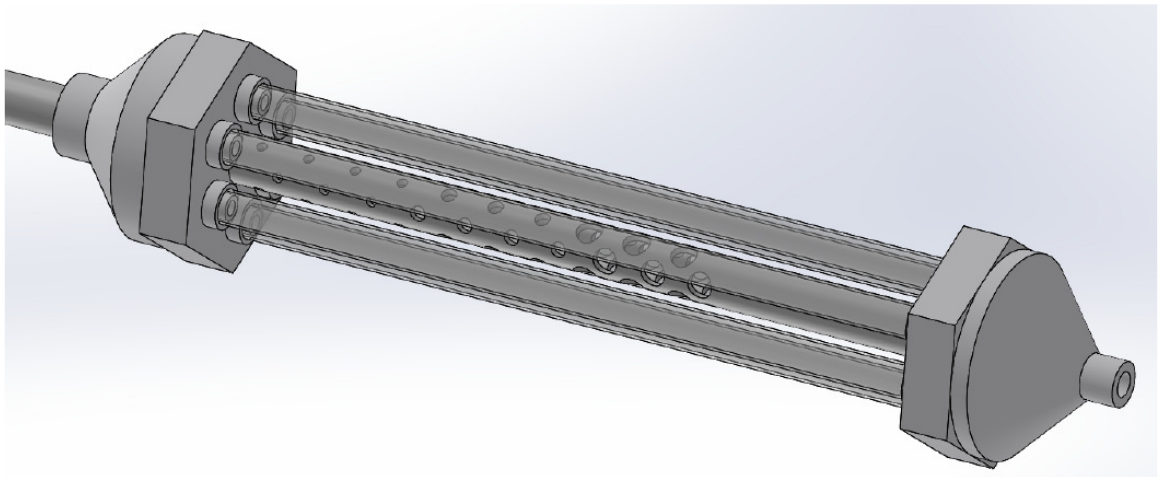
6-cell stack with integrated cooling (tapered holes) CAD design.
